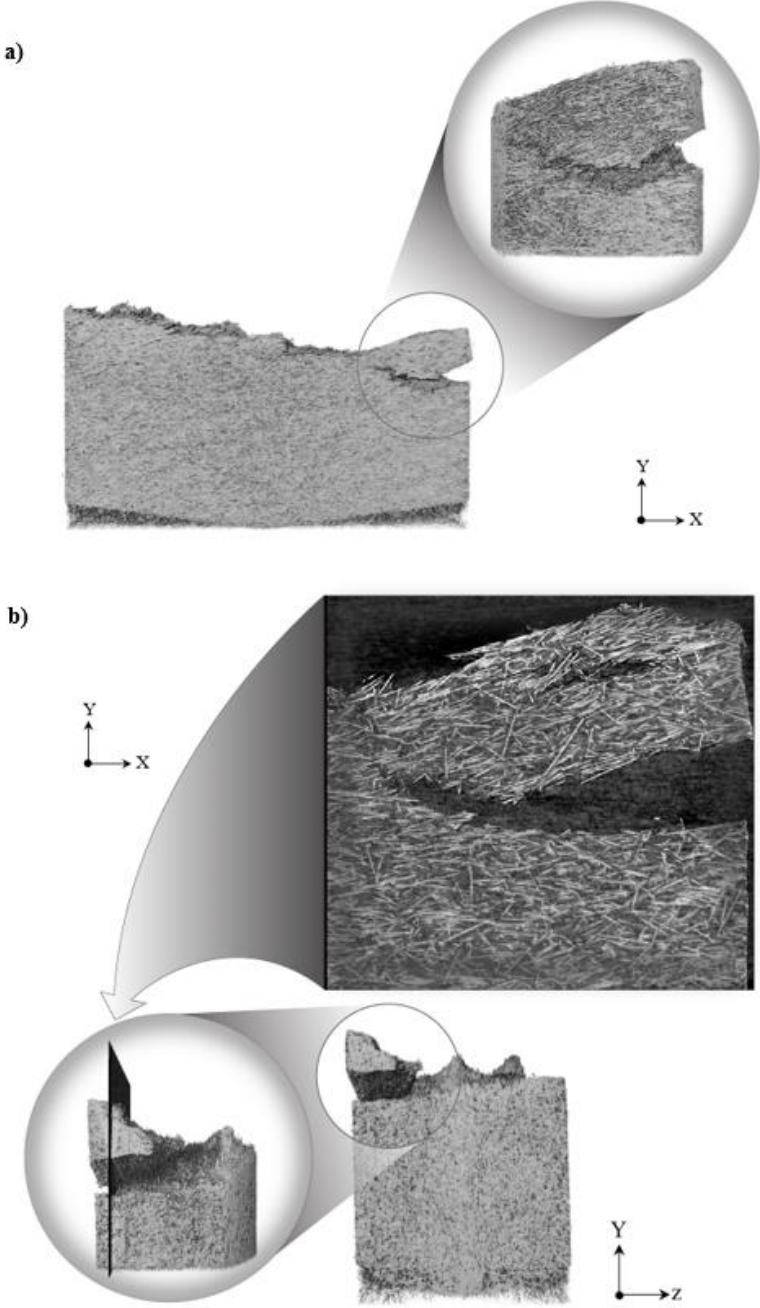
Scanned fracture surface of a fatigue 90° specimen tested at 50° C. a) front view, b) lateral view
